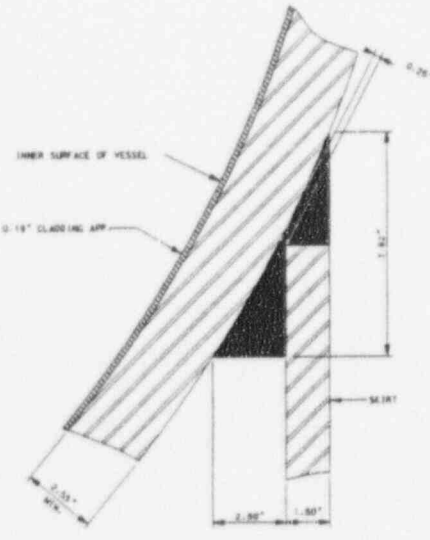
DETAIL OF UPPER HEAD TO SHELL CIRCUMFERENTIAL WELD (2-TBB03-CIRCUM-1-w)
